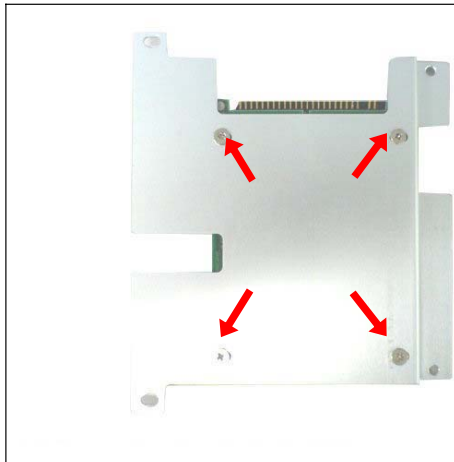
Fasten the four screws to lock HDD and bracket together.
